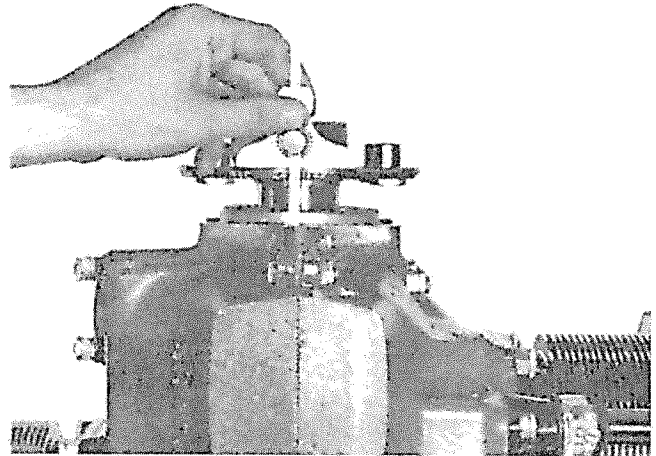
Placing Flange Crankshaft in Firing Position of No.1 Piston.
